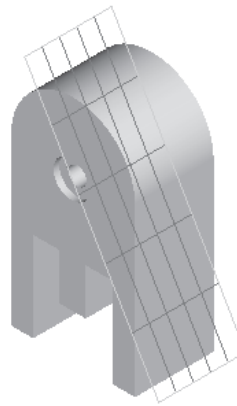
Resultant datum plane passing through the center of a cylinder and at an angle
